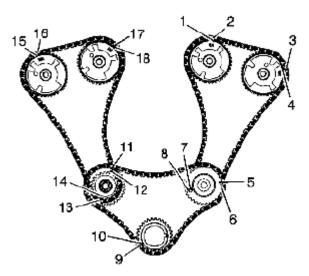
Identifying Primary And Secondary Camshaft Drive Chain Timing Mark Alignments Courtesy of SUZUKI OF AMERICA CORP.
